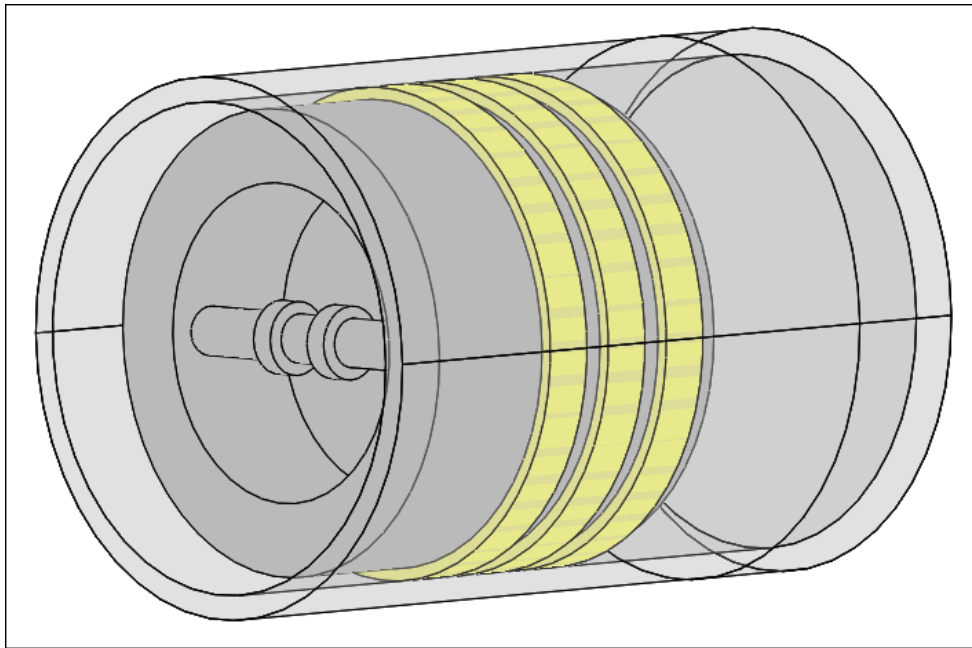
, Piston, Cylinder, and Piston Ring 3D CAD Models
